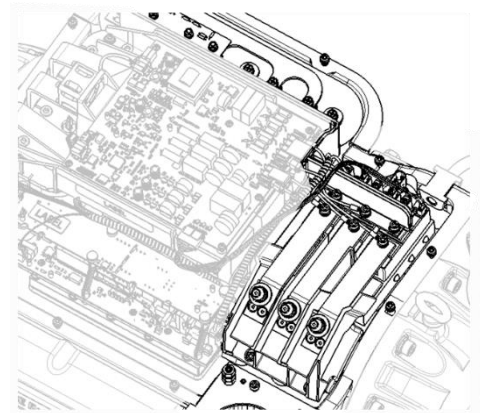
Terminal Block Assembly & Mains Bus Bars Major Revision "H"
